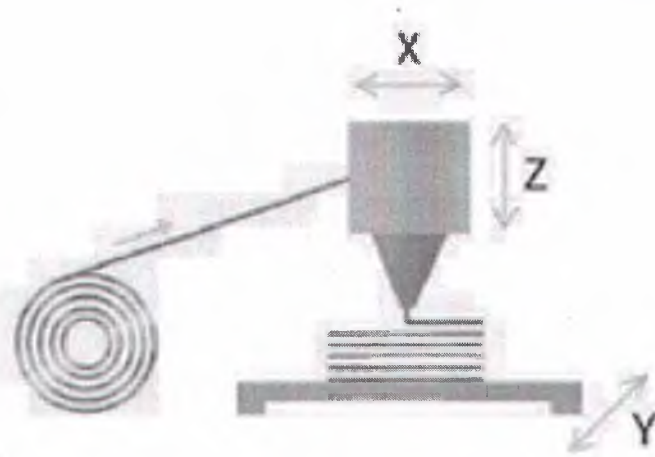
Simplified model 3D- printer employing layered fusing method (FDM)
